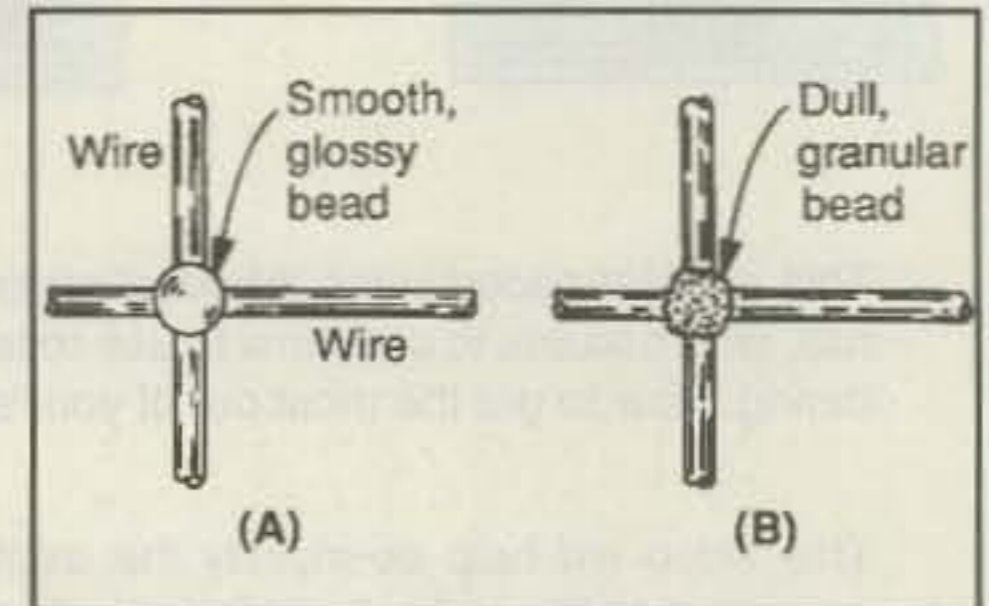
Proper soldering produces a shiny, smooth bead of solder, as at (A). A cold-solder joint is usually granular, gray, and jagged, as seen at (B).
